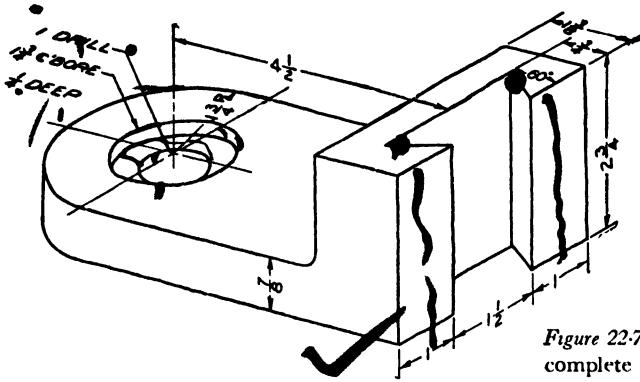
Prob. 13. Draw three complete views of the dovetail base.
